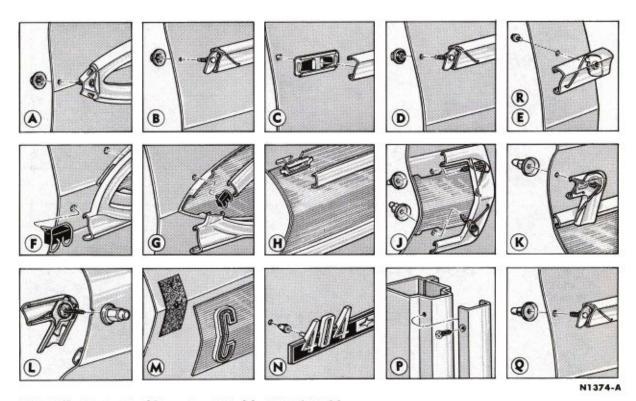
Exterior Mouldings—Comet Models 54B, 62B, 62C
